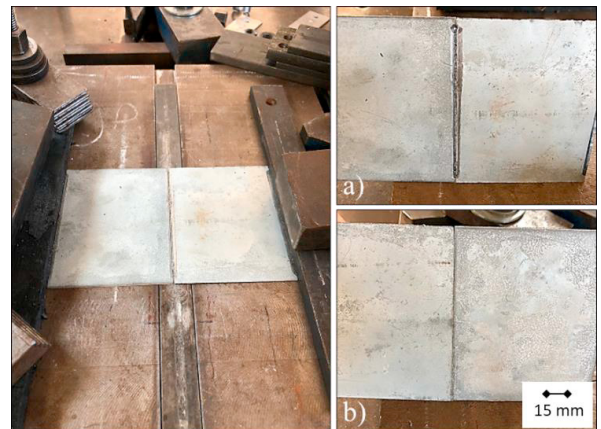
Defects shown using tool with a pin a) front and b) back views
